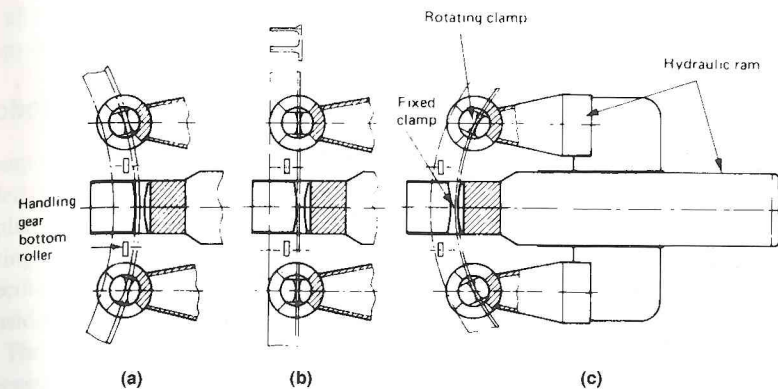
Frame bender operation: (a) bow flare bend; (b) initial position; (c) bilge turn bend
